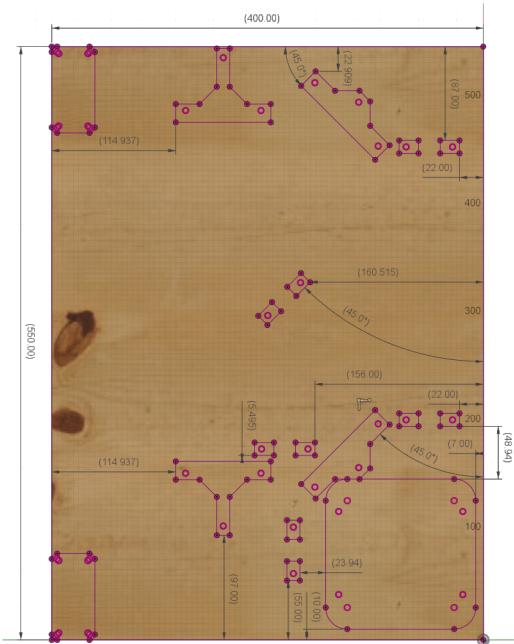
Step 24 & Fin of the Open3DScanner assembly
